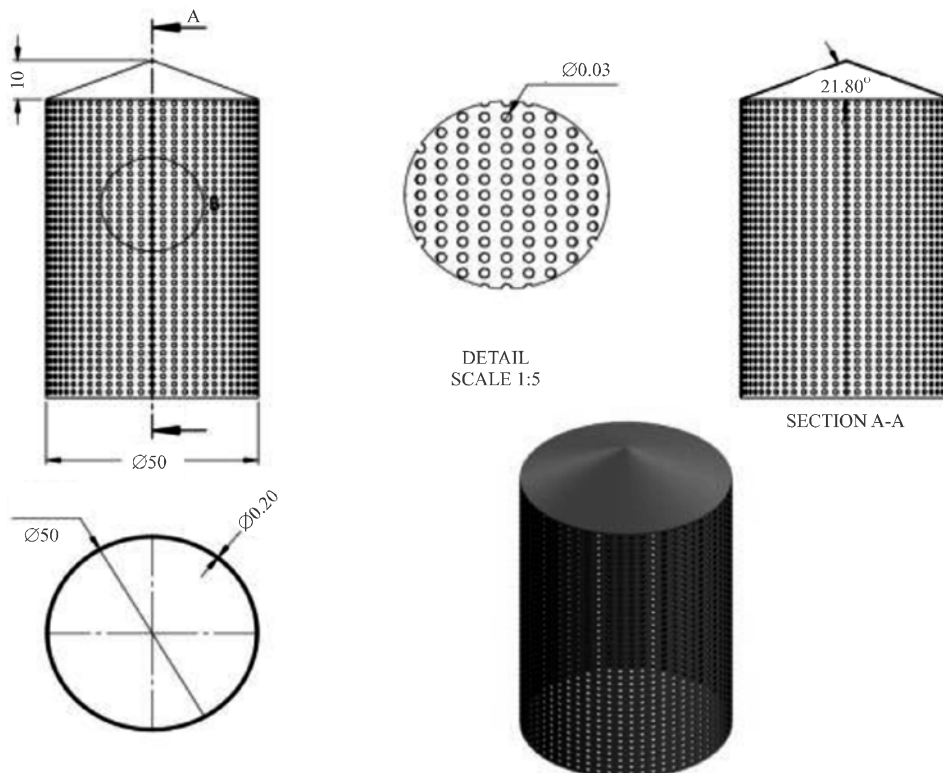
SECTIONAL VIEW OF THE PERFORATED CYLINDER OF THE DRYING CHAMBER (ALL DIMENSION ARE IN CM)
